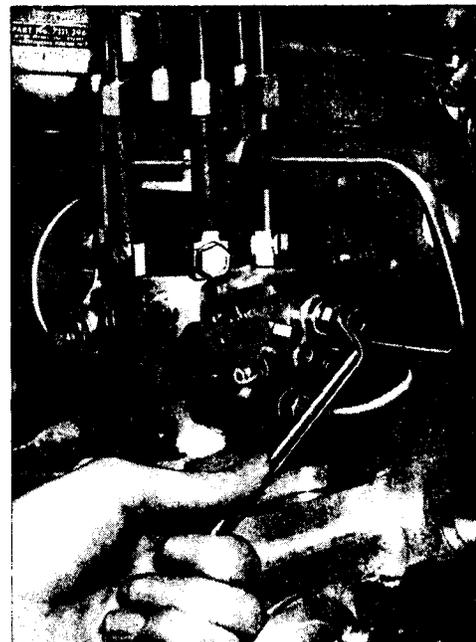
Slackening Bleed Screw on Governor Housing.
